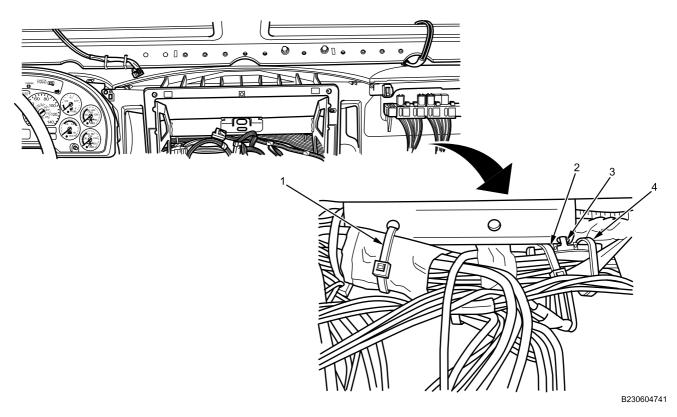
Right Side IP Harness Cable Lock Strap Removal.
